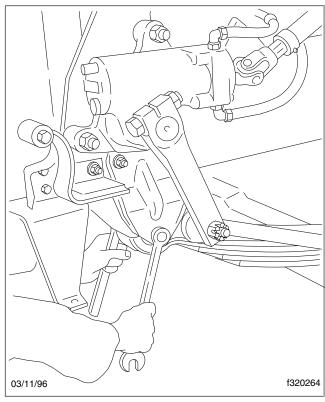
, Forward Spring Eye Bolt Removal/Installation (typical)
